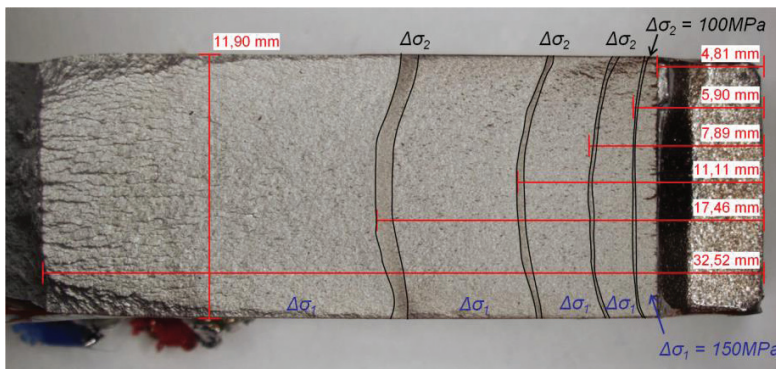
Fracture surface of the V-notch SENT specimen.
